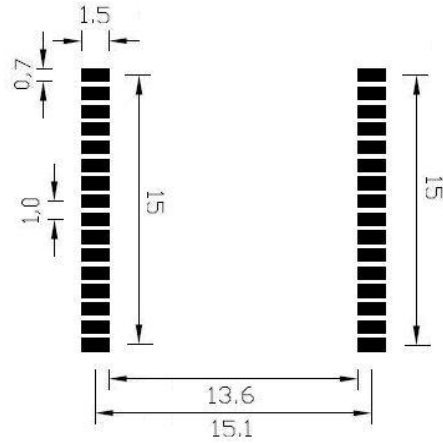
HPTZ01X-U0 module Recommended PCB footprint, Top View
